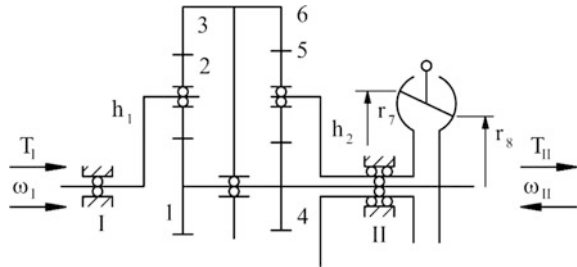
Third variants of wind turbine planetary gear-friction gear set with free carrier h_2
